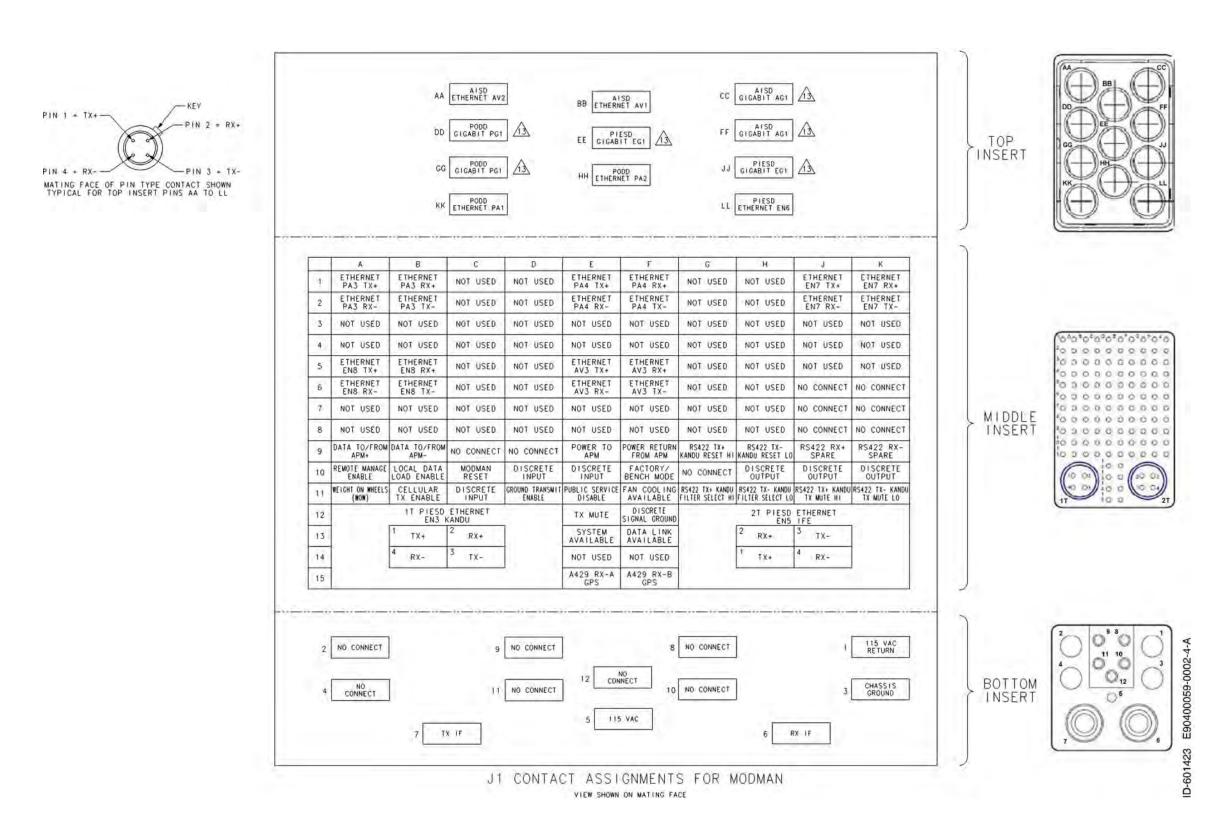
(Sheet 4 of 4) Modman Outline and Installation Drawing Variant 2 (90400059-0002, REV A)
